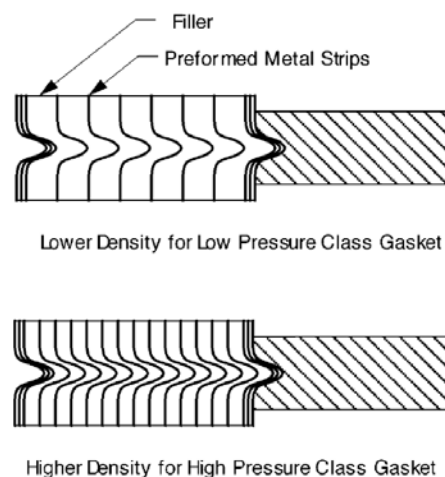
Cross sectional view of spiral wound gaskets with an outer centering / compression-stop ring [1]
